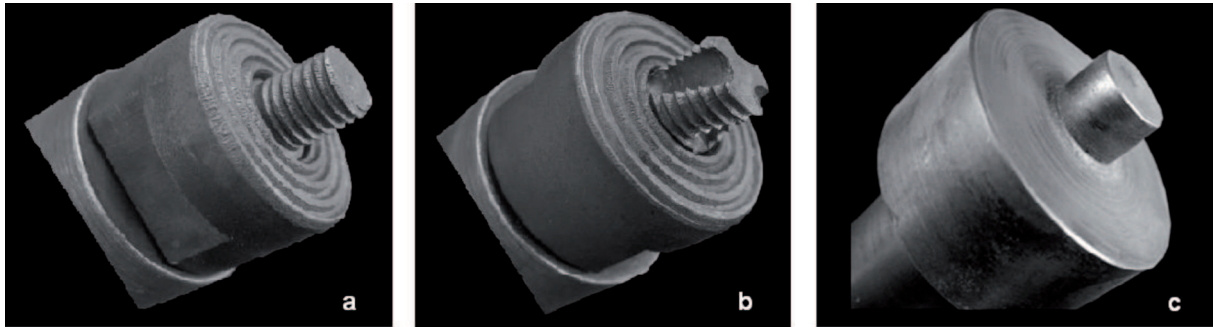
Tools used in FSW of butt welds; a) T1, b) T2, c) T3
